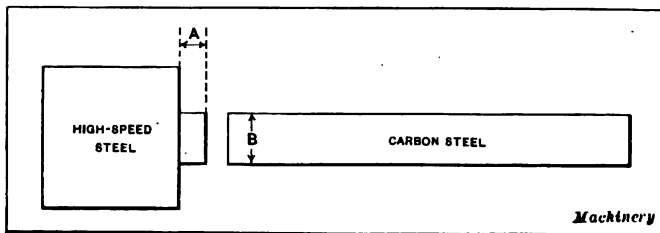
Showing Reduction necessary on Large Piece before it can be welded to a Small Diameter Shank
